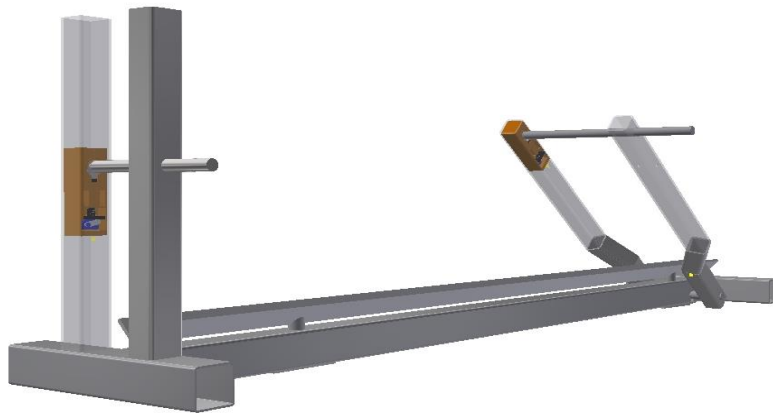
Locking Mechanism's Upper and Lower CAD
